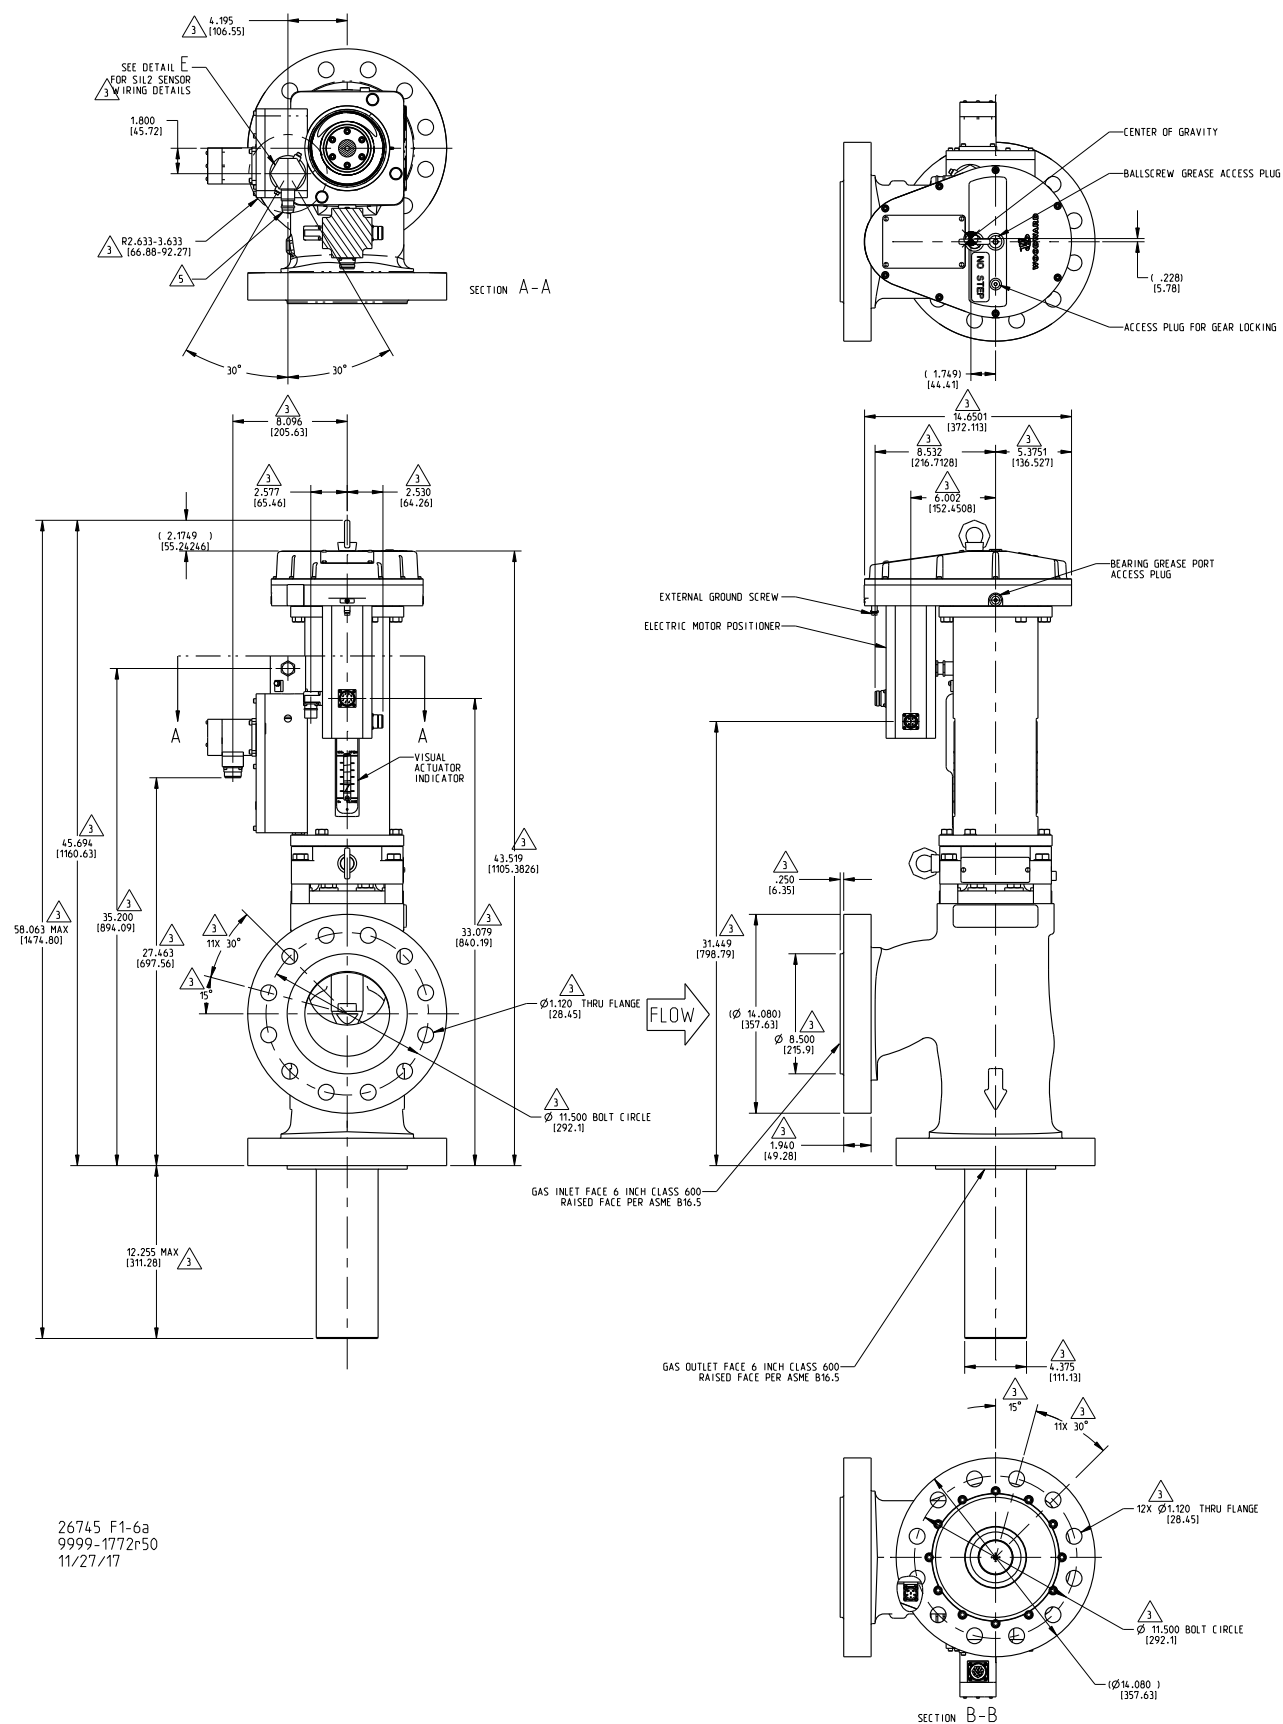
Outline Drawing (6-Inch UHR LESV)
